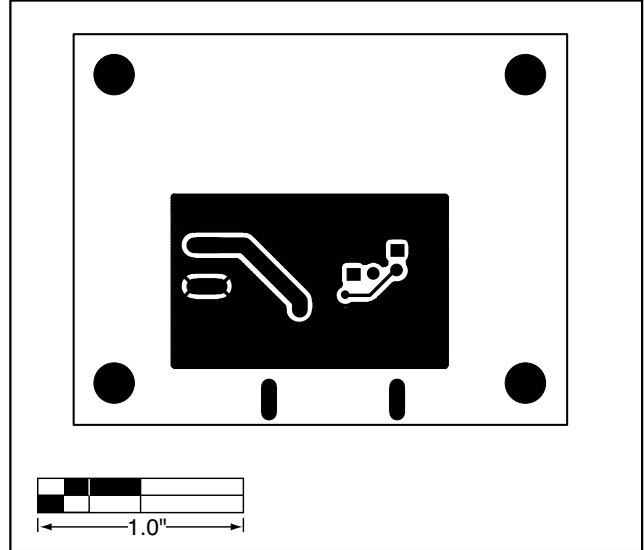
MAX1837 EV Kit PC Board Layout—Solder Side
